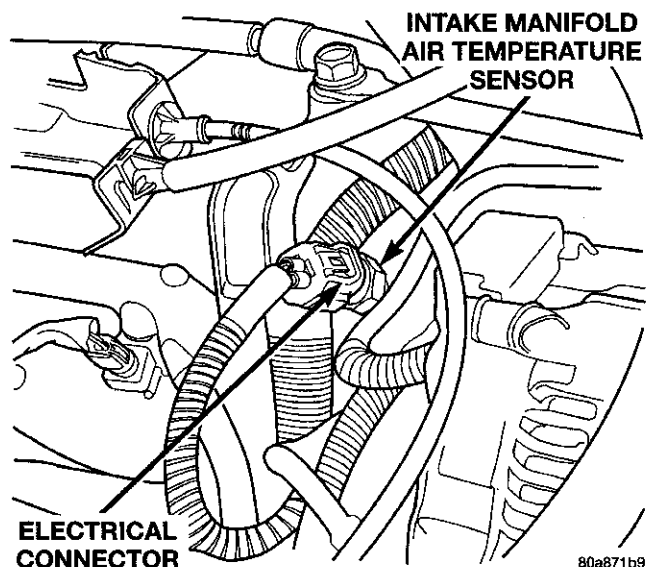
Intake Manifold Air Temperature Sensor—3.9L/5.2L/5.9L Engines—Typical (V-8 Shown)
